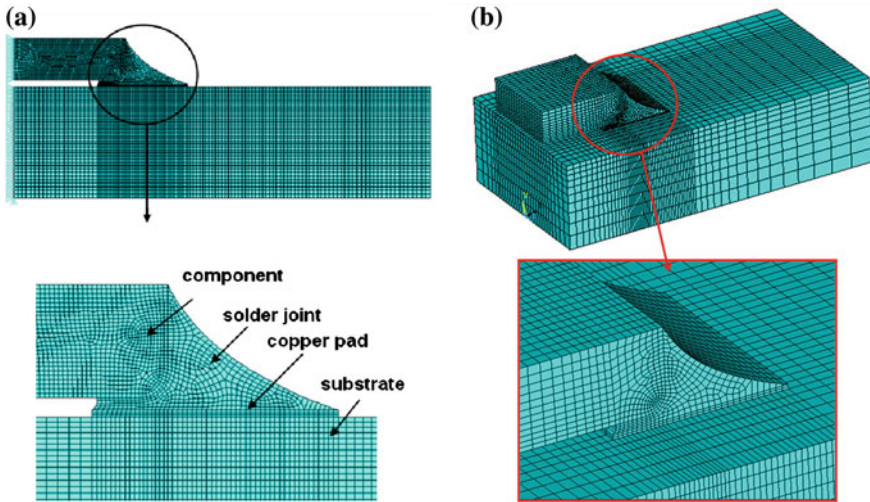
Two-dimensional (a) and three-dimensional (b) models of surface mount assembly
